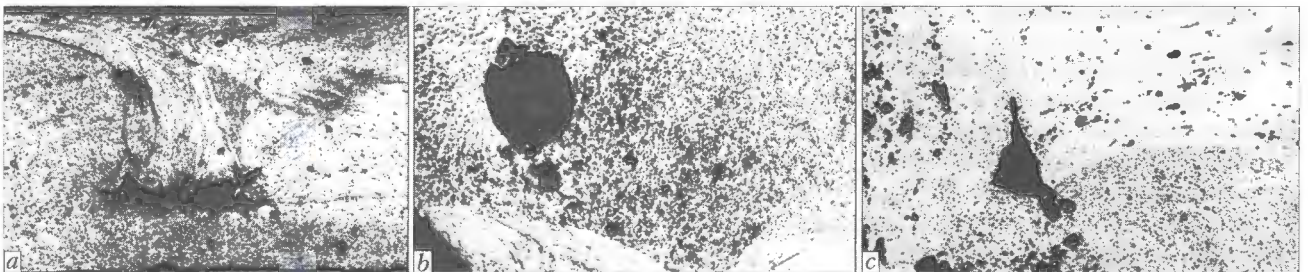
Transverse macrosection of the welded joint with a lack-of-fusion in the weld root part (*a* —  $\times 25$ ) made by FSW on AMg2M alloy 2 mm thick, and microstructure ( $\times 300$ ) of weld section (*b*) in the place of defect location
